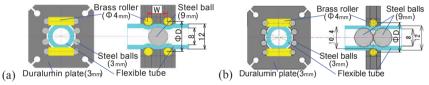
Construction of rod-less type flexible pneumatic cylinder for (a) Single ball type and (b) Double ball type
